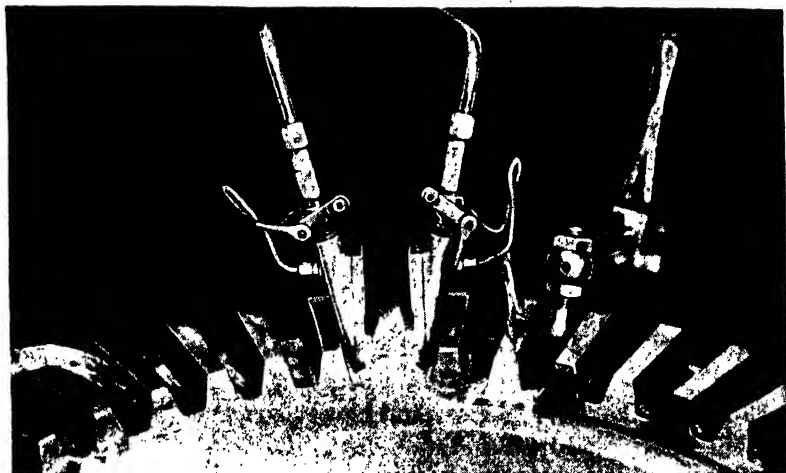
A.—Gleason hardening jets and indexing pin for large bevel gears.
